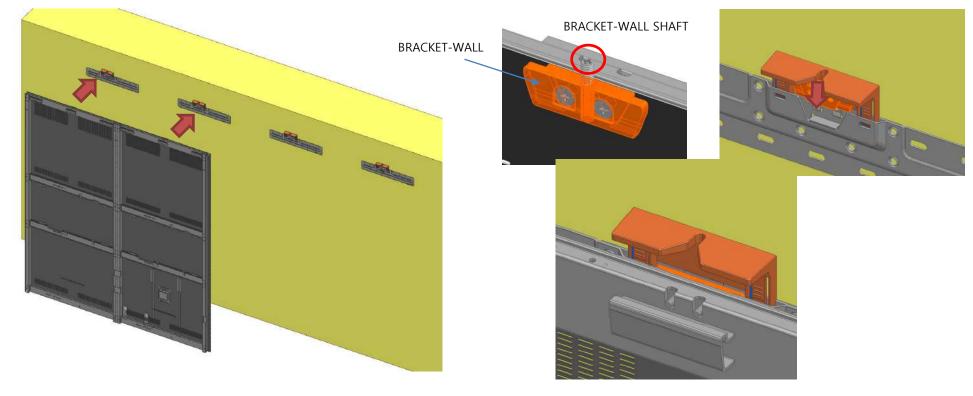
Install LEFT first Fig.2 Wall mount fixing
